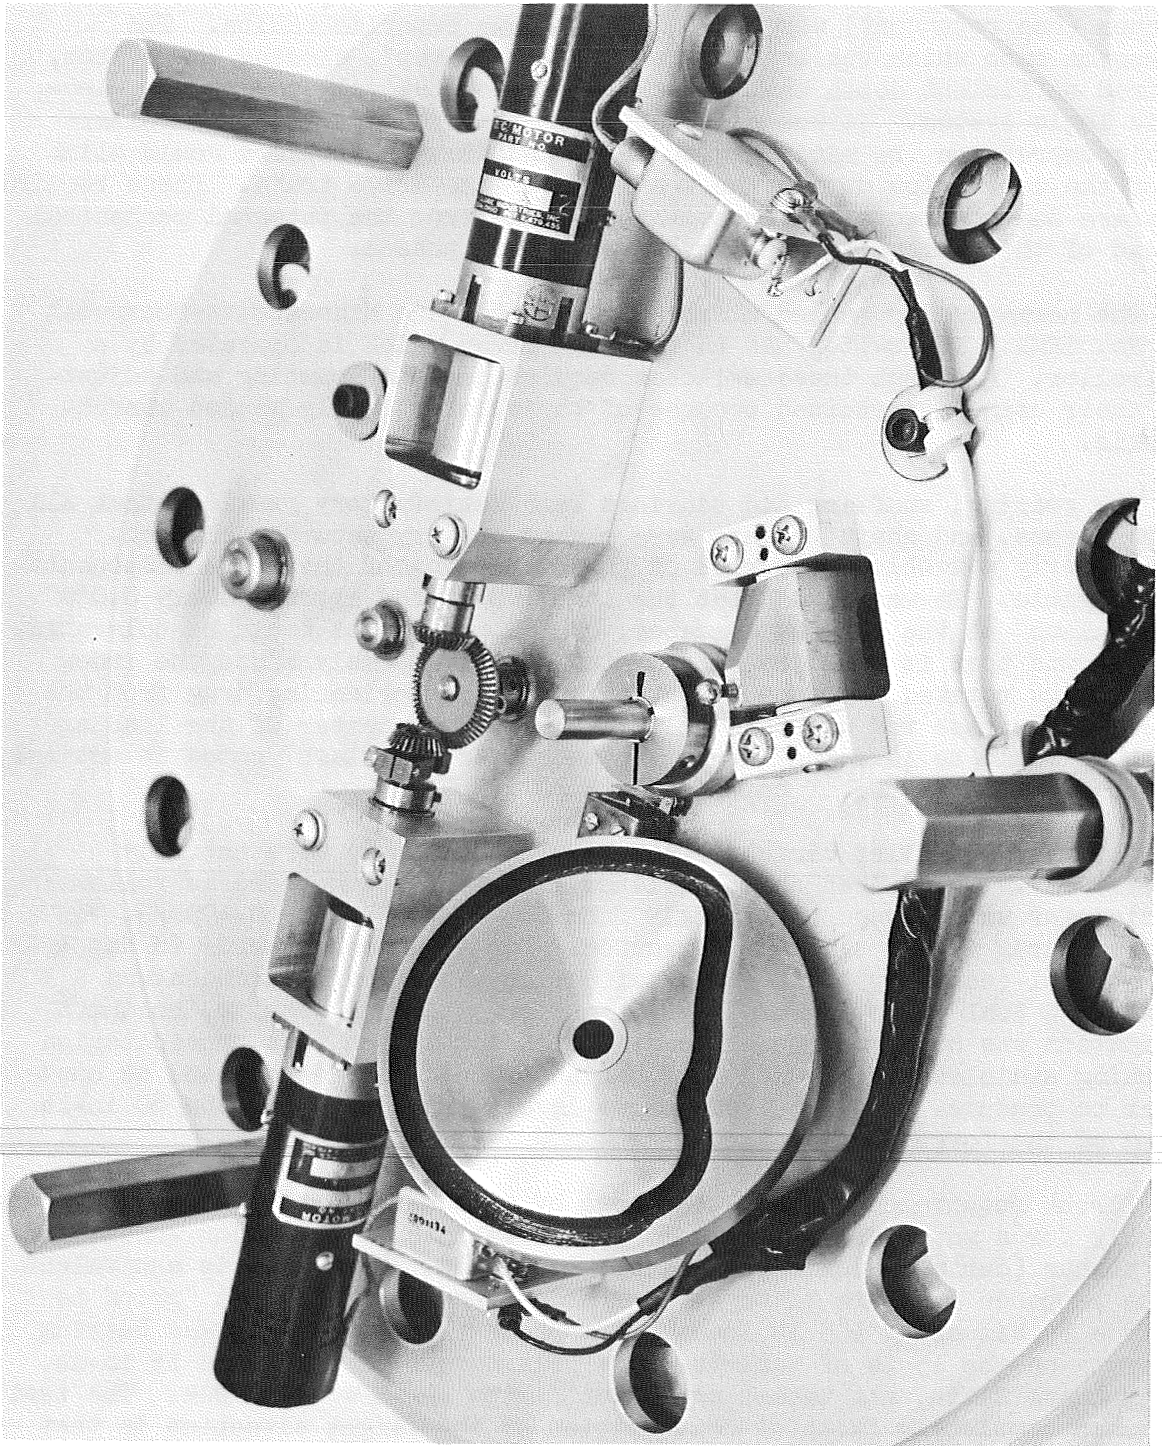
Bottom View of Feeder Mechanism Partly Disassembled
